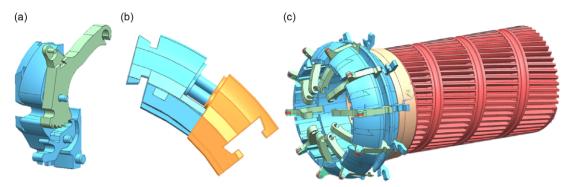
Construction of the gripper device: (a) – The finger mechanism; (b) – Two parts of the housing module; (c) – The housing assembly.
